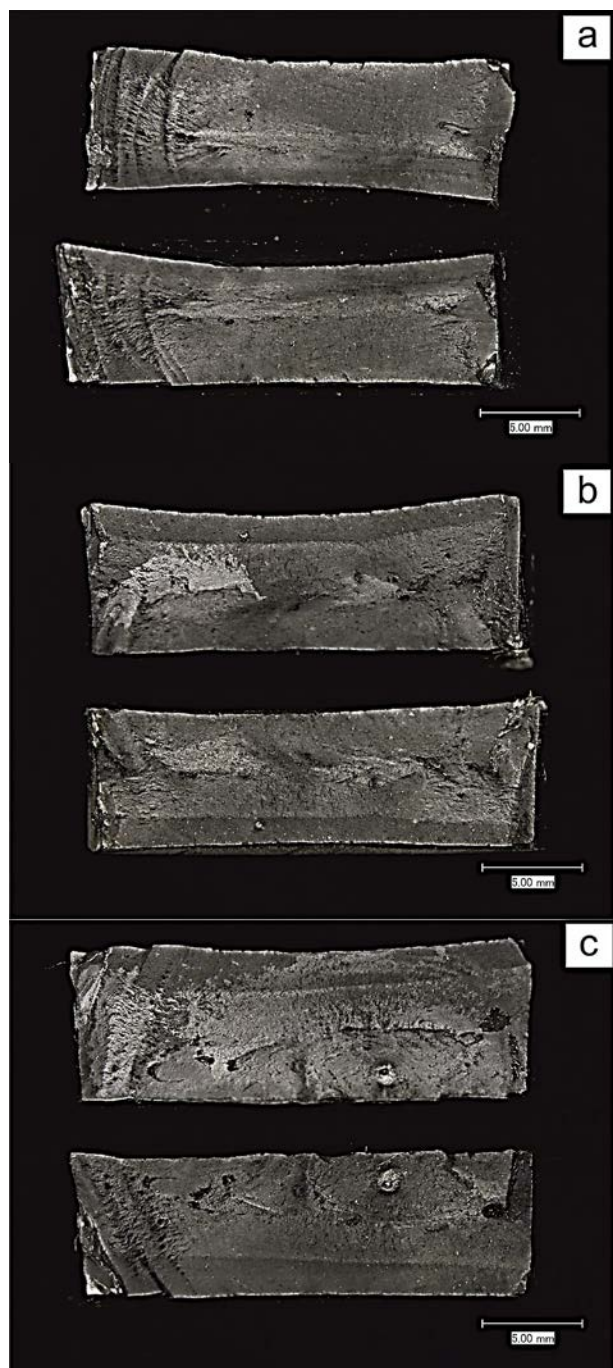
Optical macrographs of the fracture surface of the tensile test specimens; a) top, b) middle, c) bottom.
